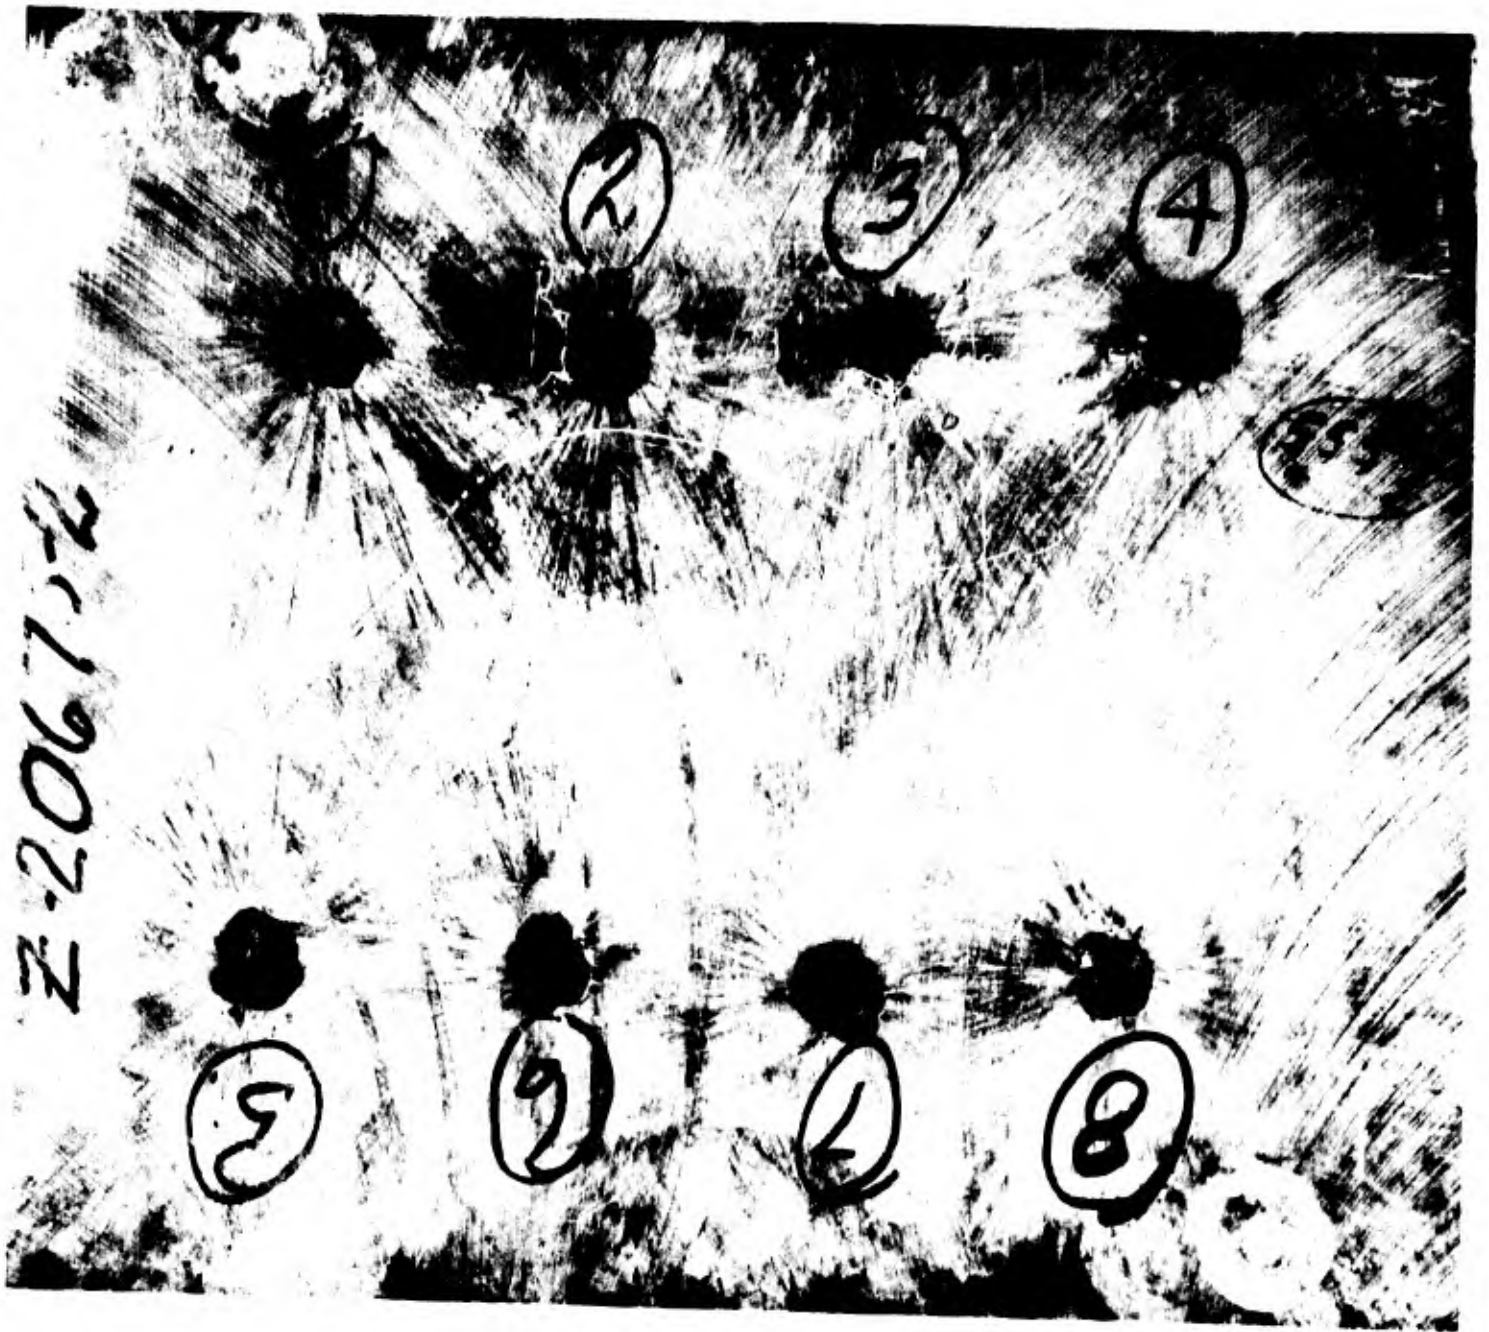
A. Plate Z2067-2, front. This 0.704-inch-thick plate did not break into pieces or crack even after eight caliber 0.50 AP shots, six of which completely penetrated through the plate. X1/2.
